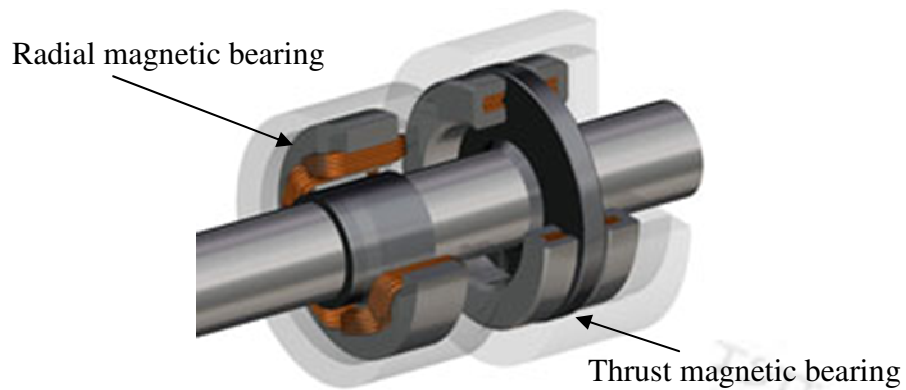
A 3D solid model of rotor with one radial and a double acting magnetic thrust bearings (Courtesy: S2M)
